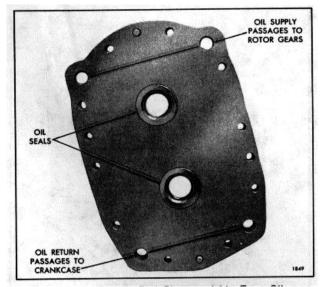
Blower End Plate and Lip Type Oil Seal Location.
